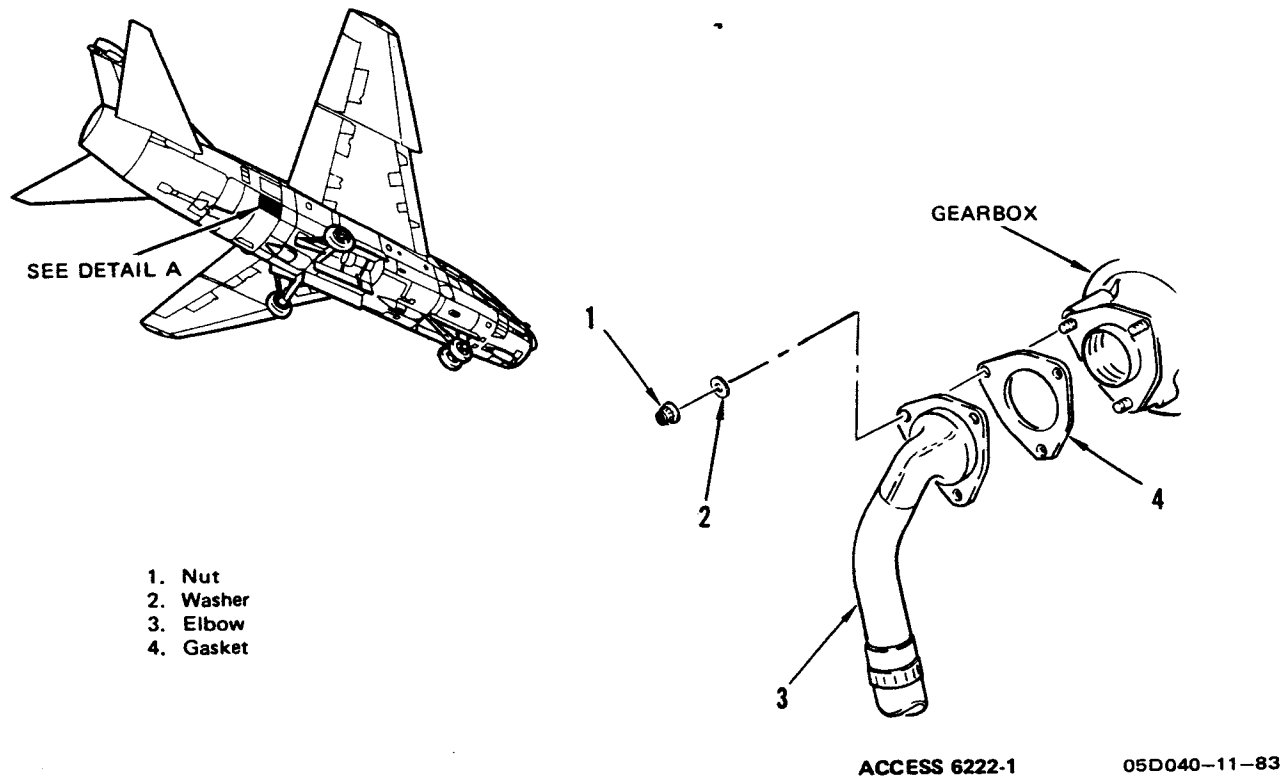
Installation and Removal; High Pressure Compressor Rotor Turning Adapter
